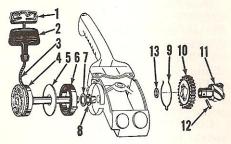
Exploded view of rewind starter. Cord (3) should be 45 inches long.
